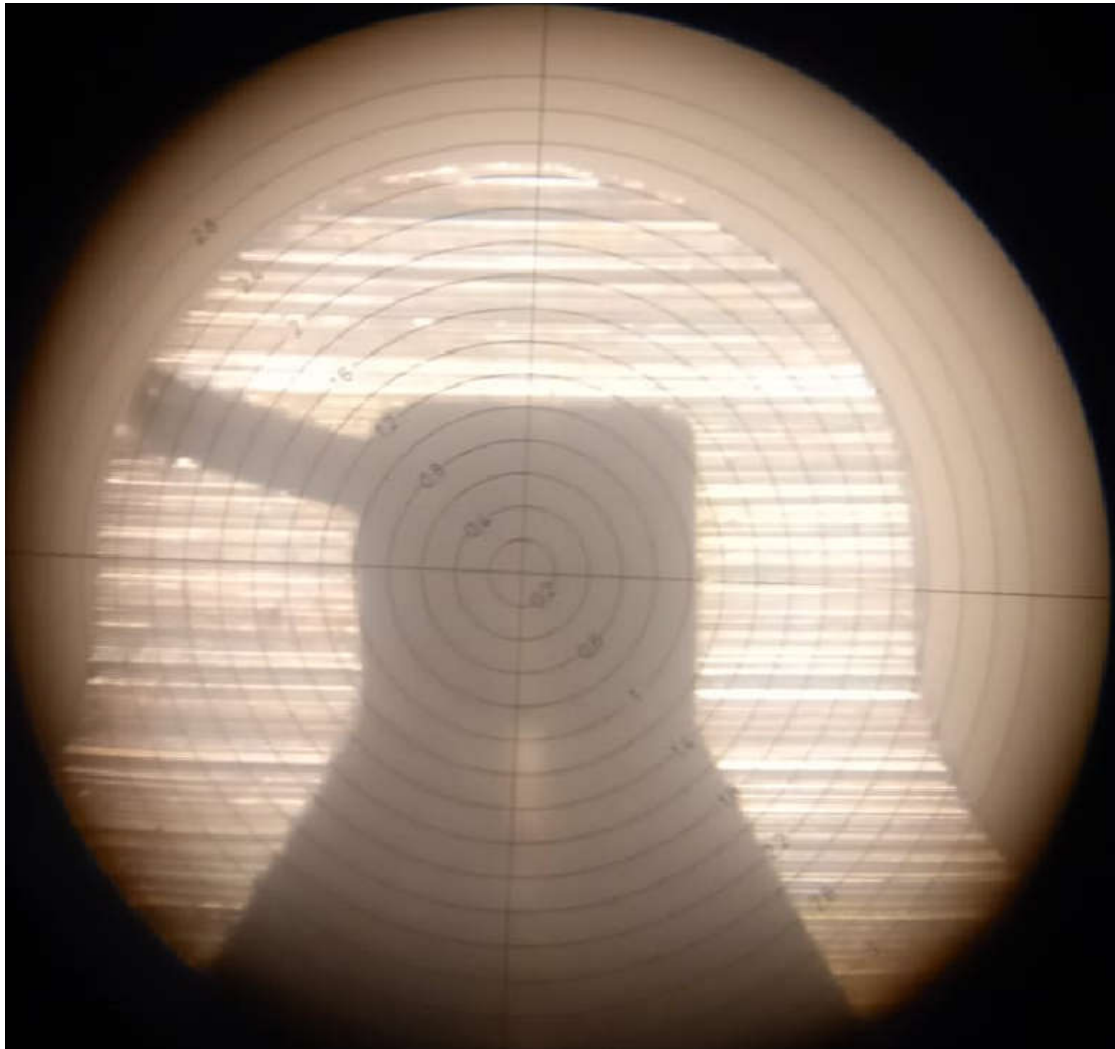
Image of the injection nozzle section on the axis of symmetry of the spray hole
